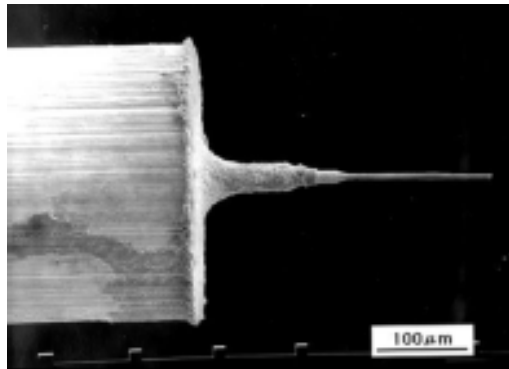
Micro tool electrode fabricated by WEDG method
